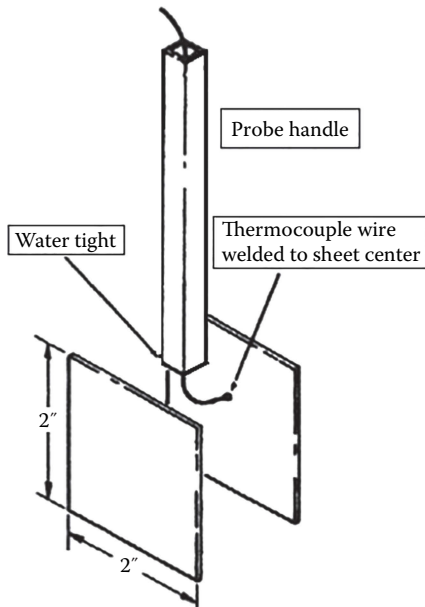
Aluminum sheet probe. Sheet edges must be TIG welded watertight before use
